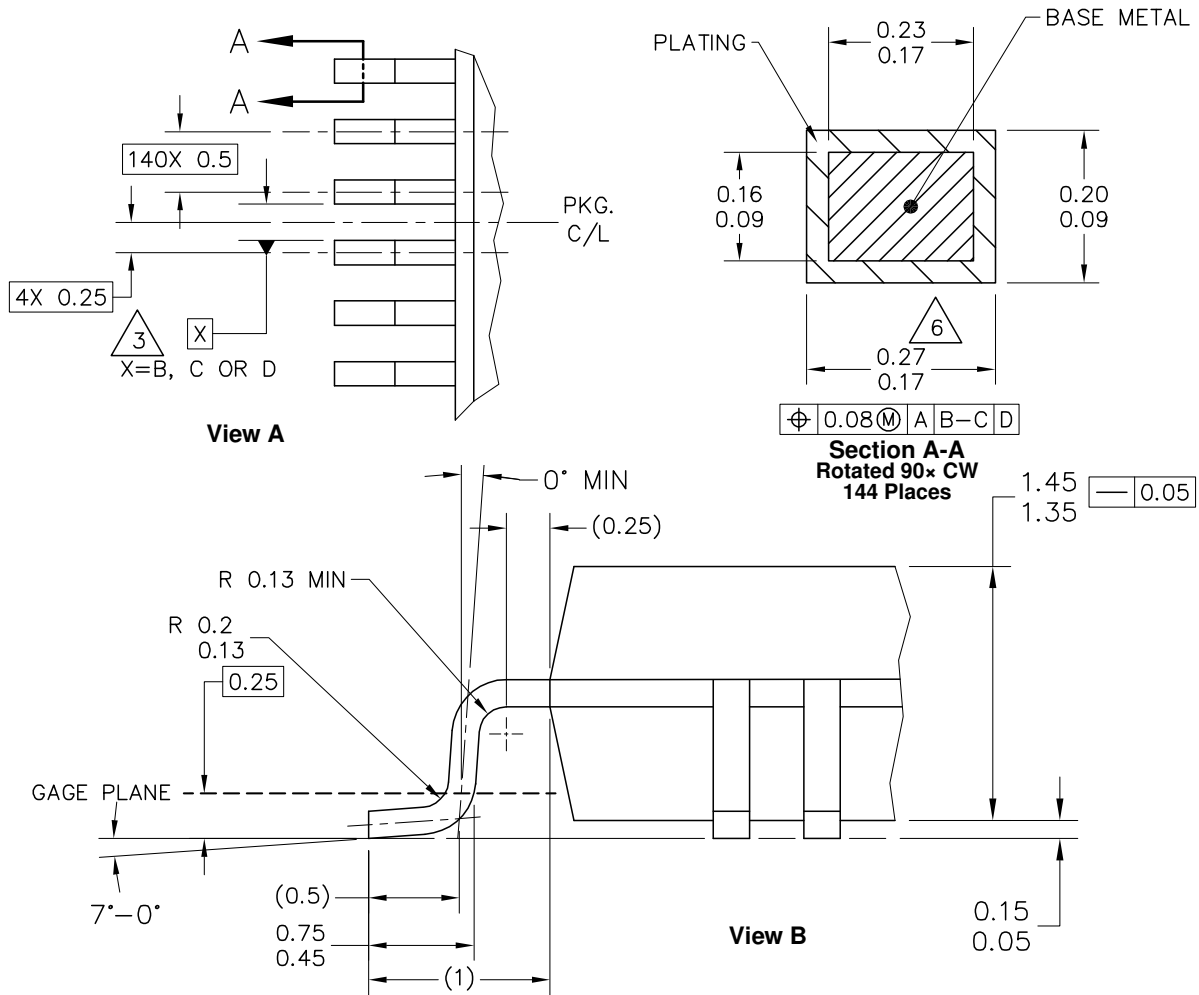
MCF5207CAB166 Package Dimensions (Sheet 1 of 2)
